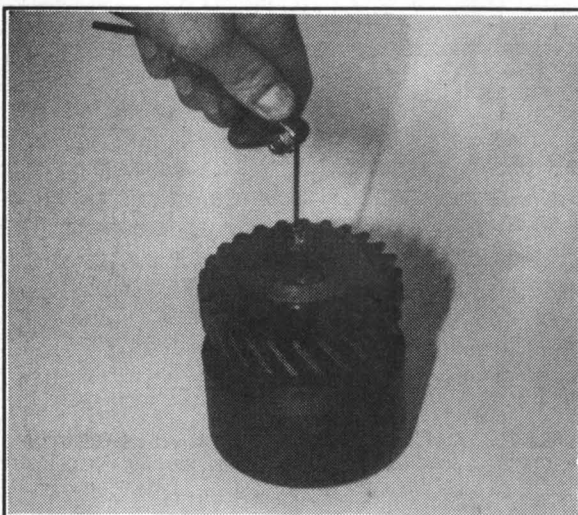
Remove the socket head screws holding the beveled spacer & remove it.
